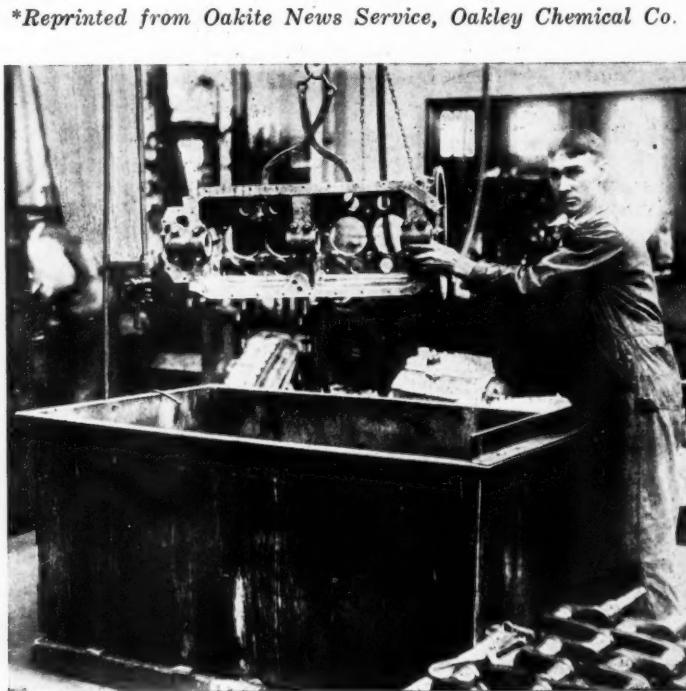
Cleaning crankcase in motor assembly room for progressive truck assembly
